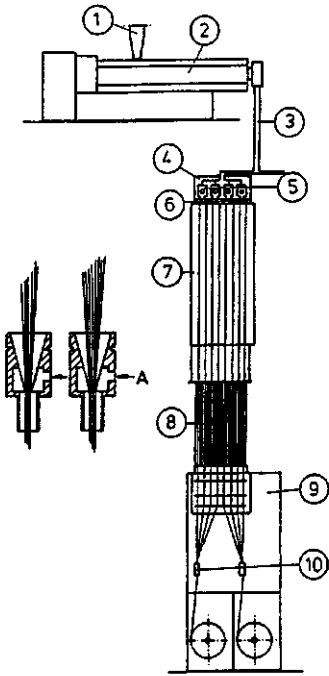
Steam conditioning tube for 16 PA66 yarns: upper section [24]
